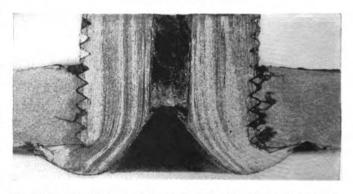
Section of sheet at the root of the thread showing a crack originating in the interior of the sheet
